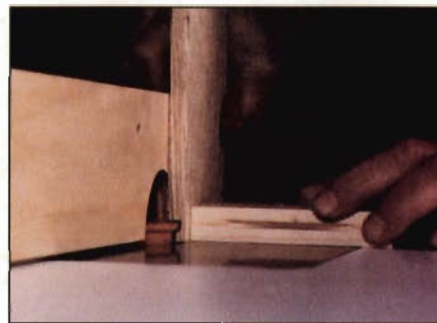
Photo D: Profile 2 bit cutting drawer side. When routing longer sides, use a tall fence, a longer backing board, and a feather board for better support of the workpieces.
